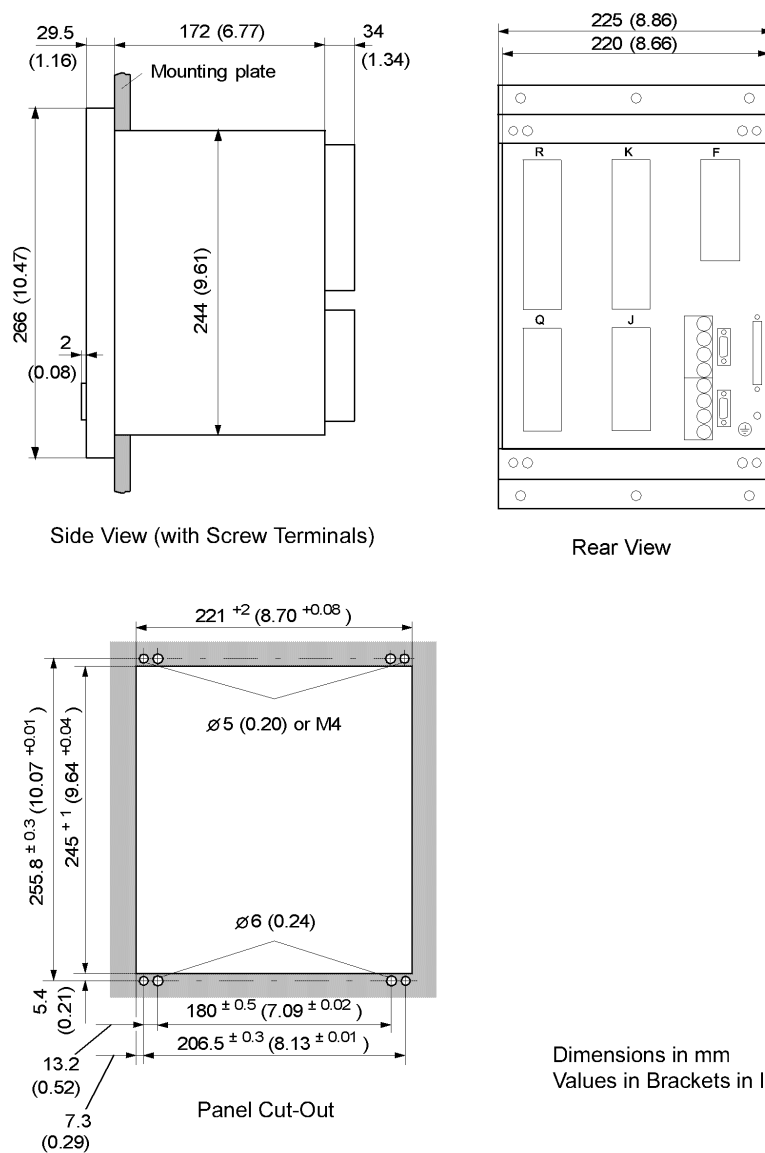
Dimensional drawing of a 7ST6 for panel flush or cubicle mounting (housing size $1\frac{1}{2}$)
